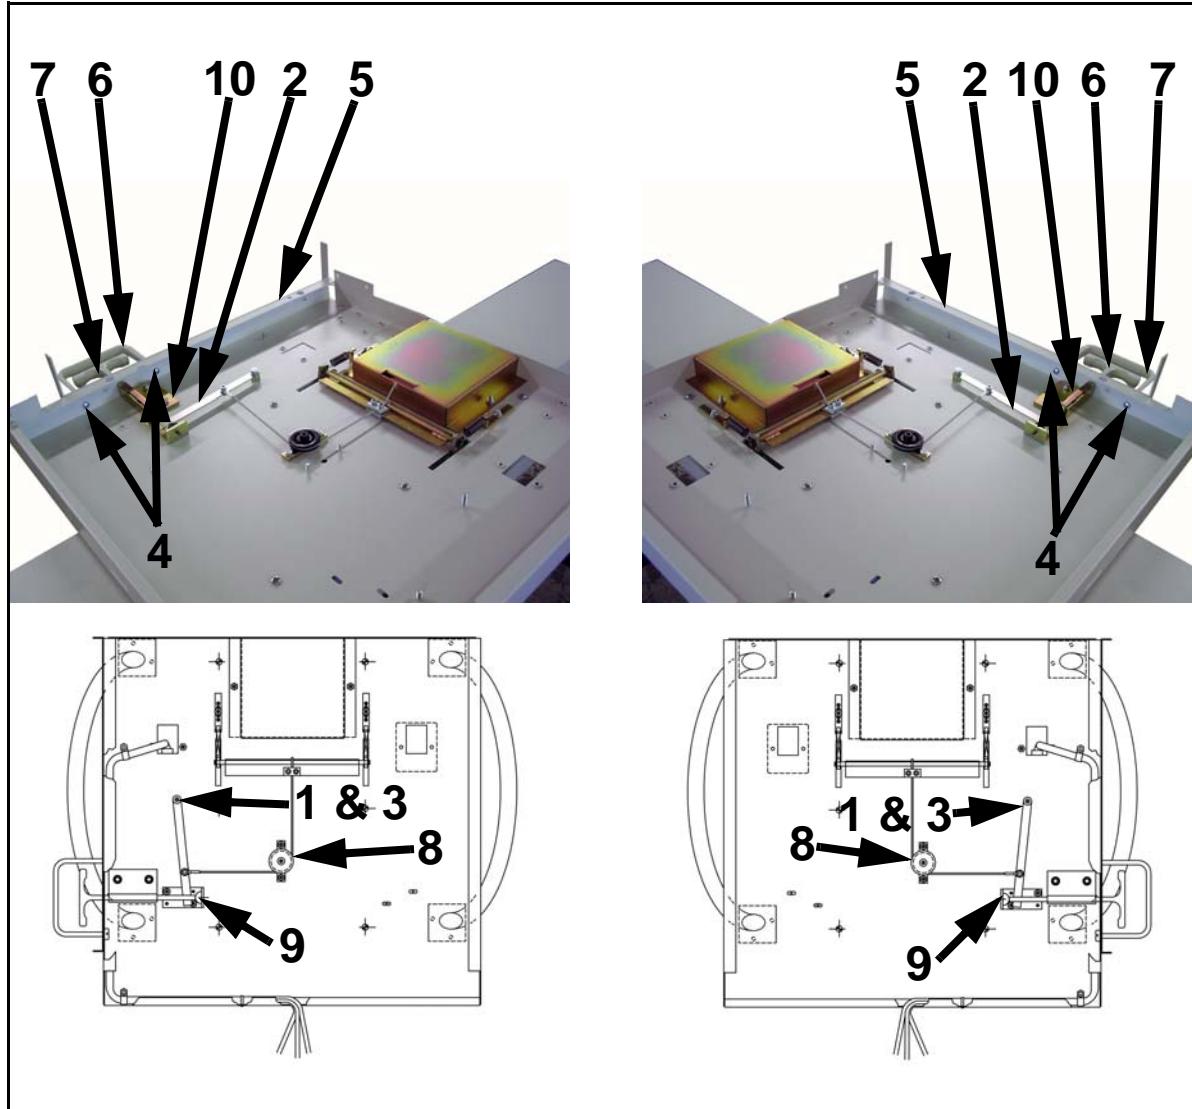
Figure Addendum E-15. Lock Mechanism Assembly (Left & Right Shown)
